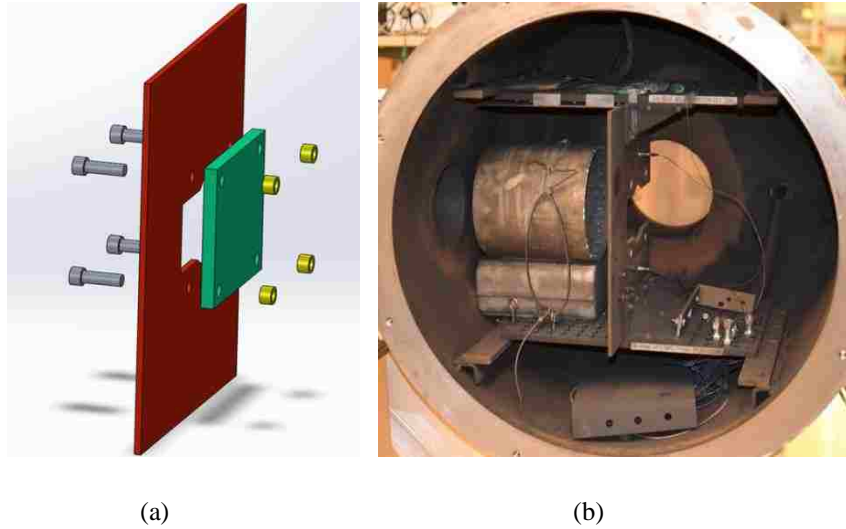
(a) Target plate mounting configuration and (b) target mounting plate inside chamber
